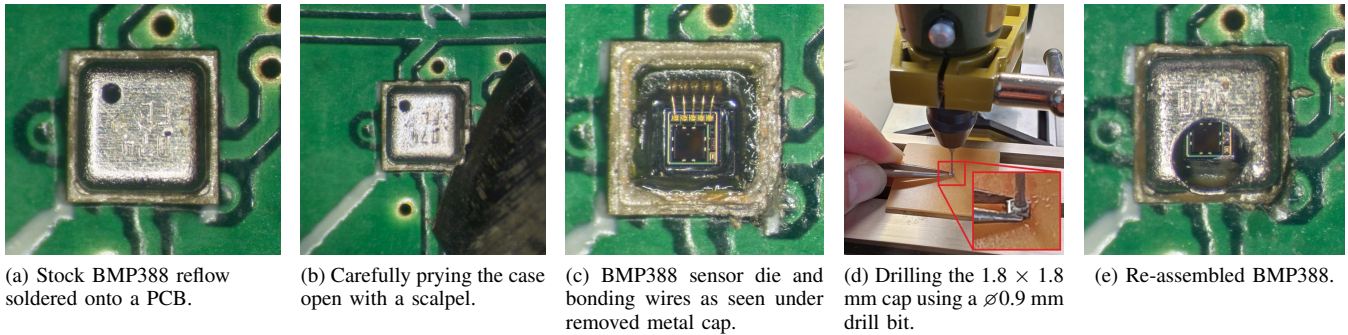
The modification steps to enlarge the orifice of a BMP388 digital barometer chip from factory $\varnothing 0.25$ mm to $\varnothing 0.9$ mm. (a) The chip is soldered onto a PCB for easier handling. (b) The cap is carefully removed using a scalpel, revealing the sensor die and its bonding wires (c). (d) With tweezers, the cap is positioned and held steady during drilling. (e) The modified cap is re-glued, but rotated 180° relative to the original orientation. This hides and protects the bonding wires under the cap from physical damage.
